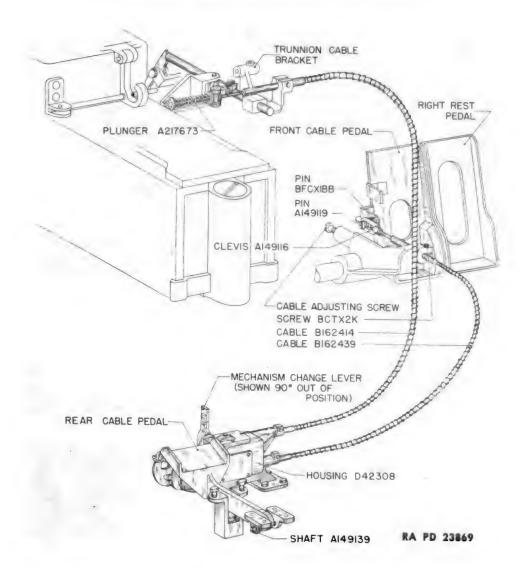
Foot Firing Mechanism, M3A1 Carriage
